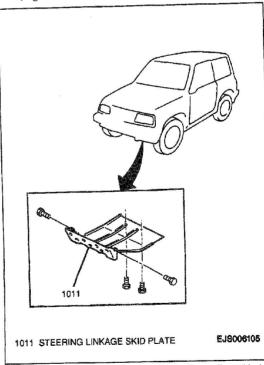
Steering Linkage Skid Plate—Two - Door Model Shown, Four - Door Model Similar
